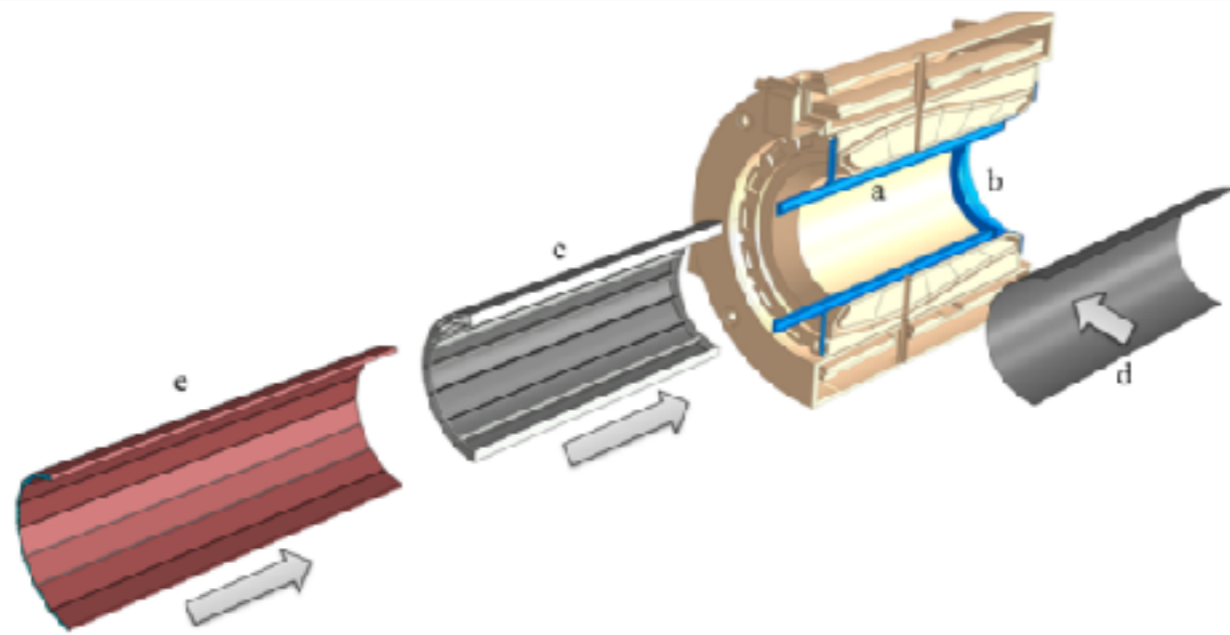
Installation procedure of the barrel - half section view: (a) central tracker (CT) beams, (b) downstream CT beam support cone, (c) half-frame of the barrel, outer sheet mounted, (d) inner sheet of the half-frame, (e) eight bar boxes.
